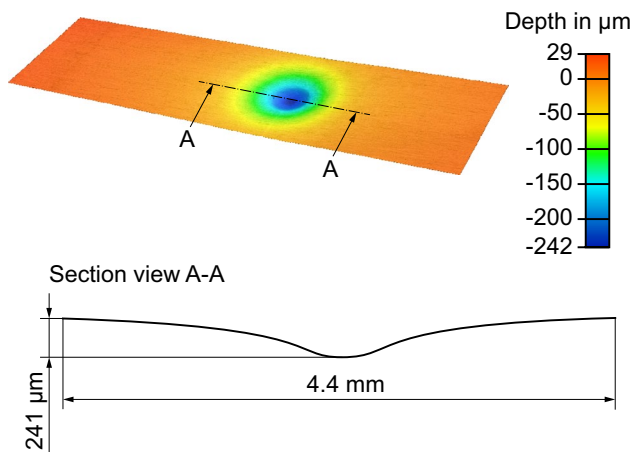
3D scan and profile of the embossed sheet metal. The measured section view of the specimen indicates a maximum depth of 241 μm
